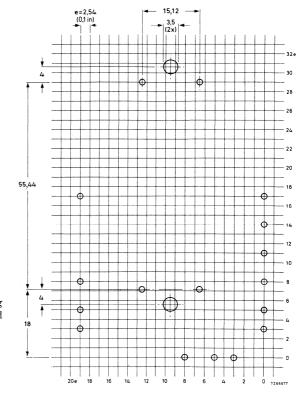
Hole pattern for mounting on a printed-wiring board (solder side).
